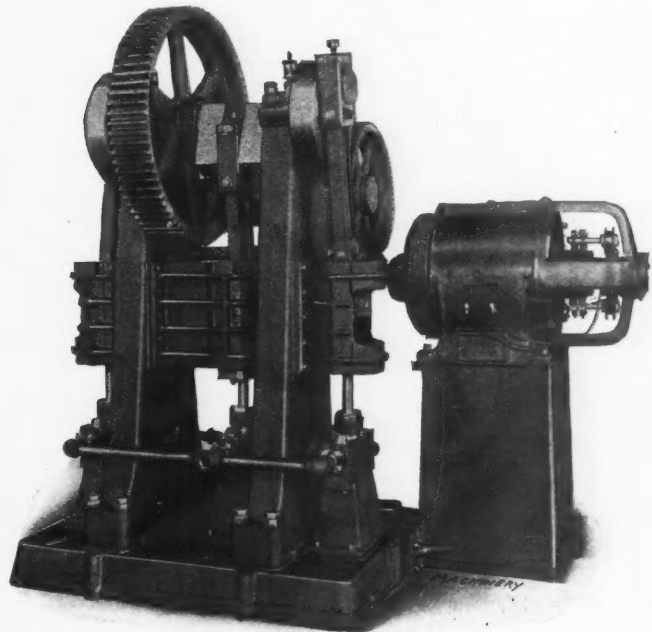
Front View of Improved Lees-Bradner Gear Hobber
